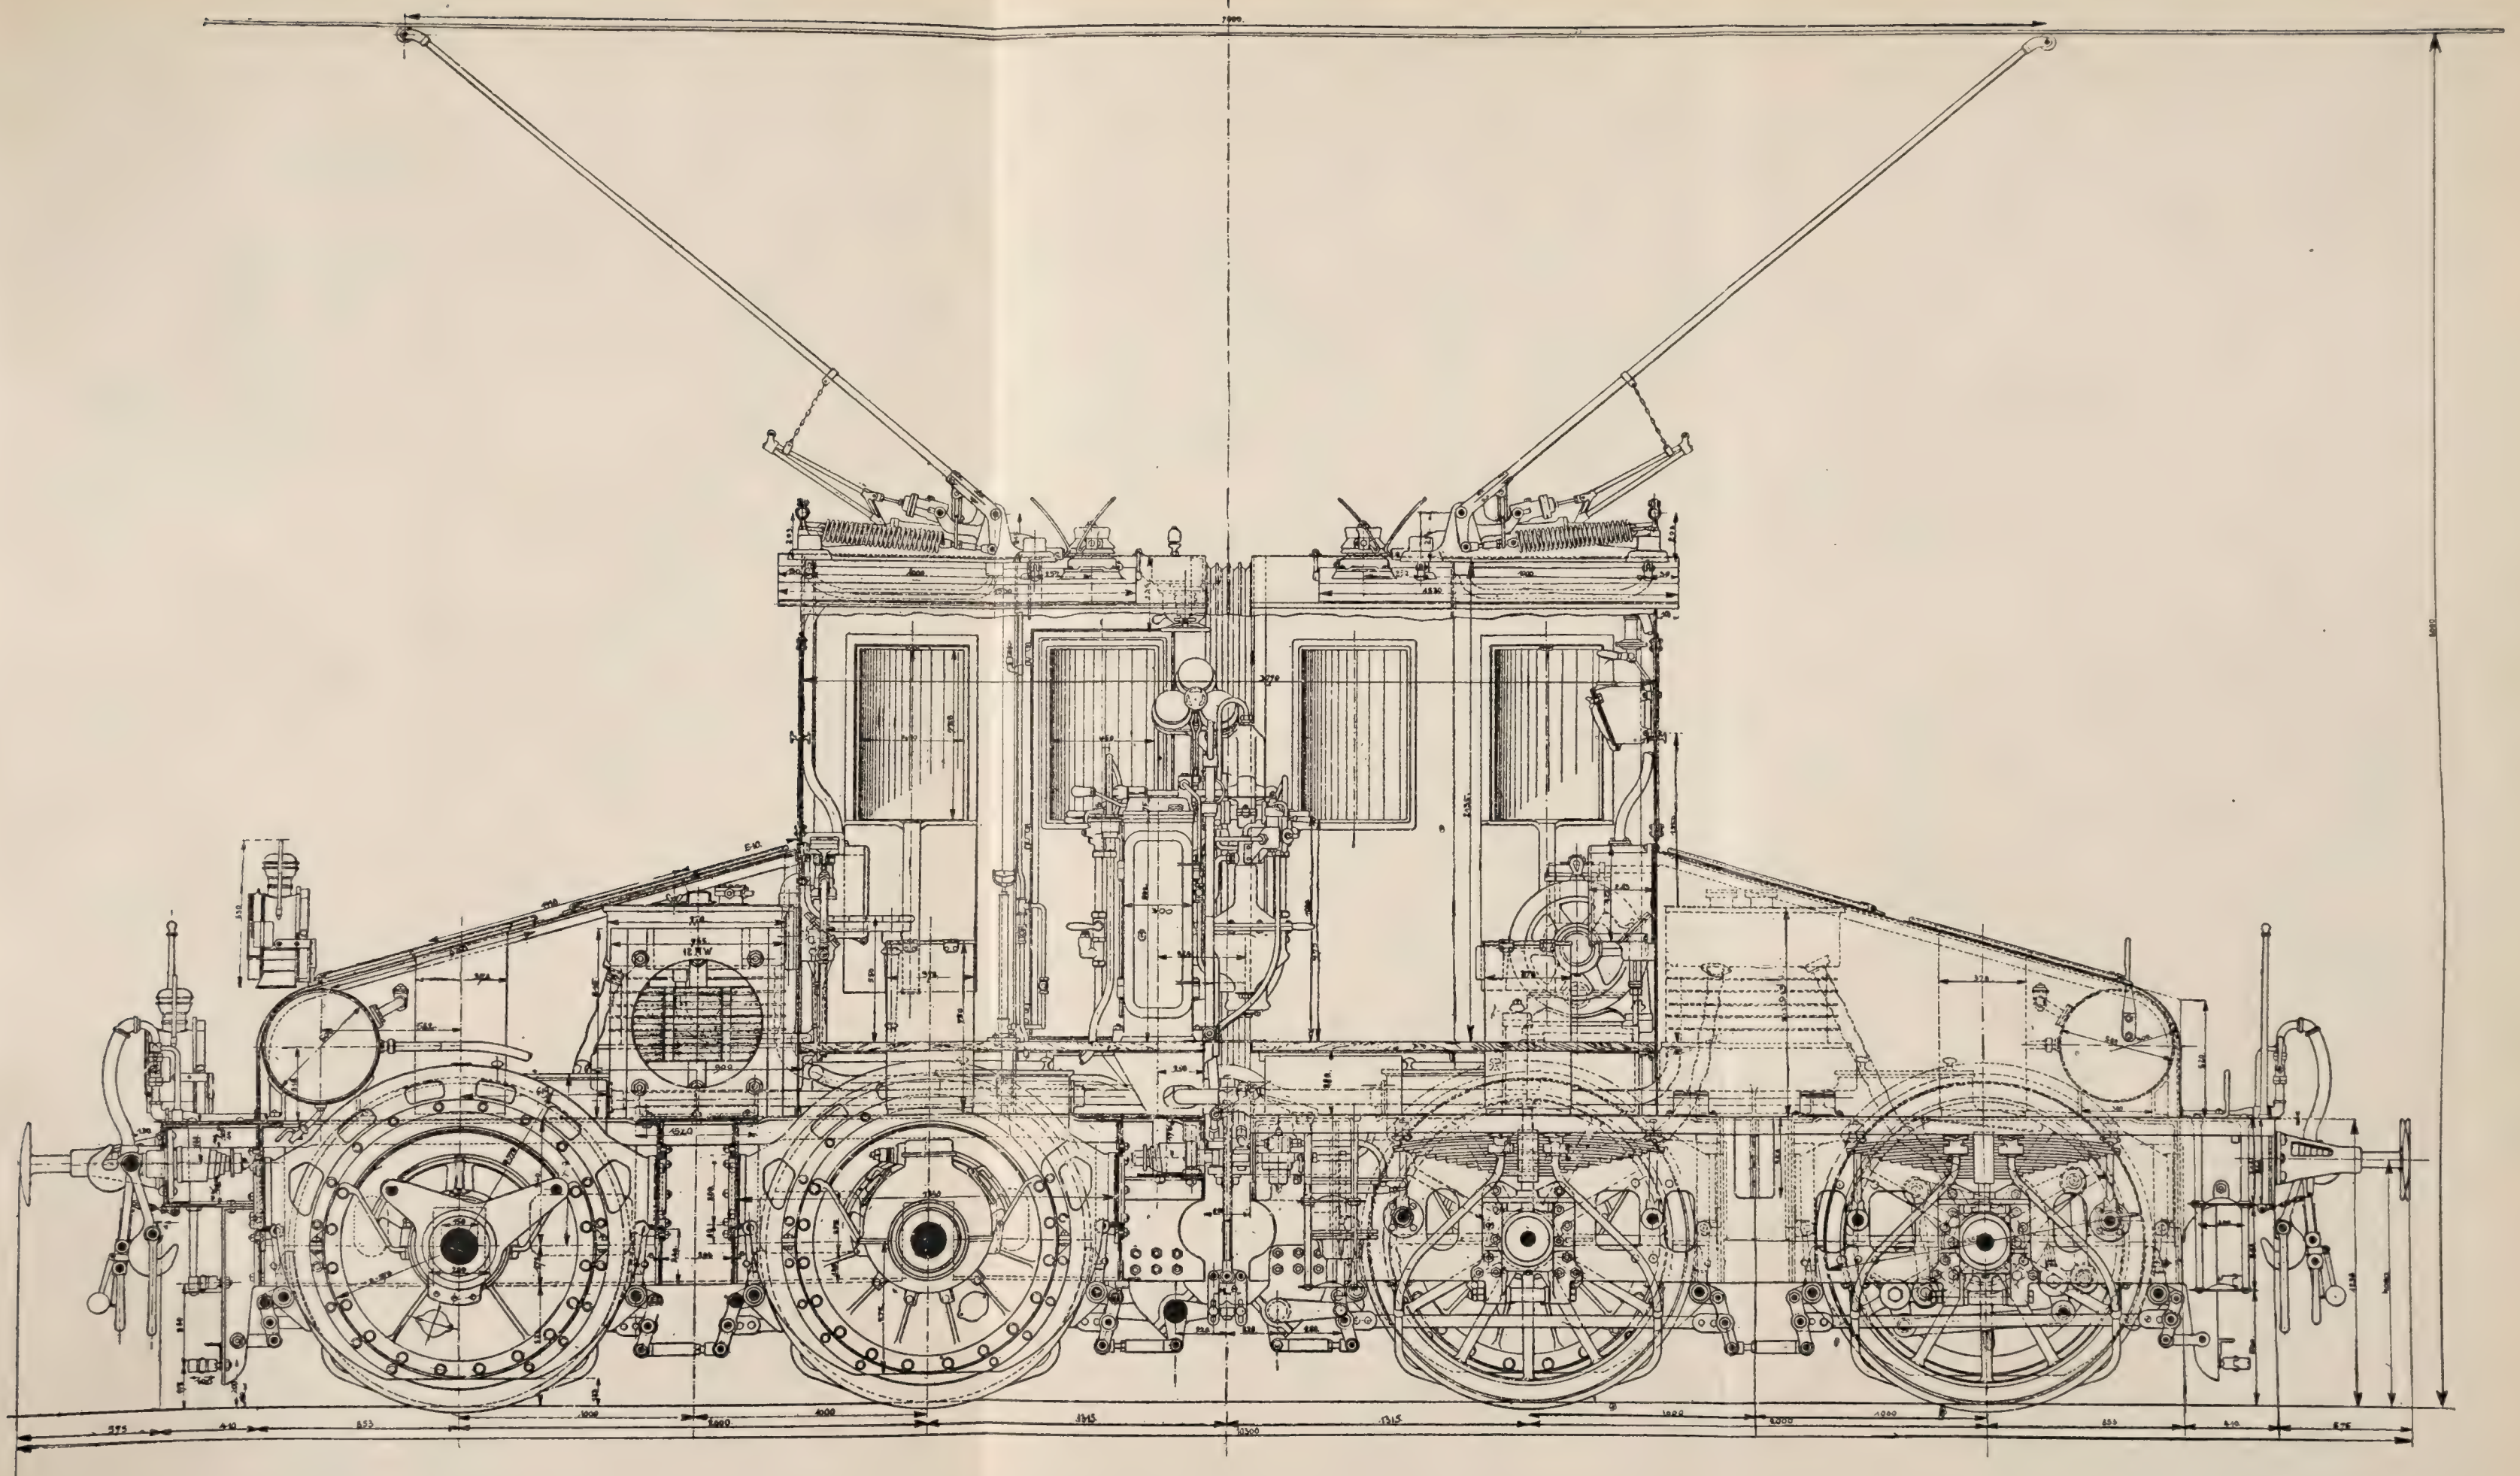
EARLY TYPE OF VALTELLINA (GEARLESS) LOCOMOTIVE.
